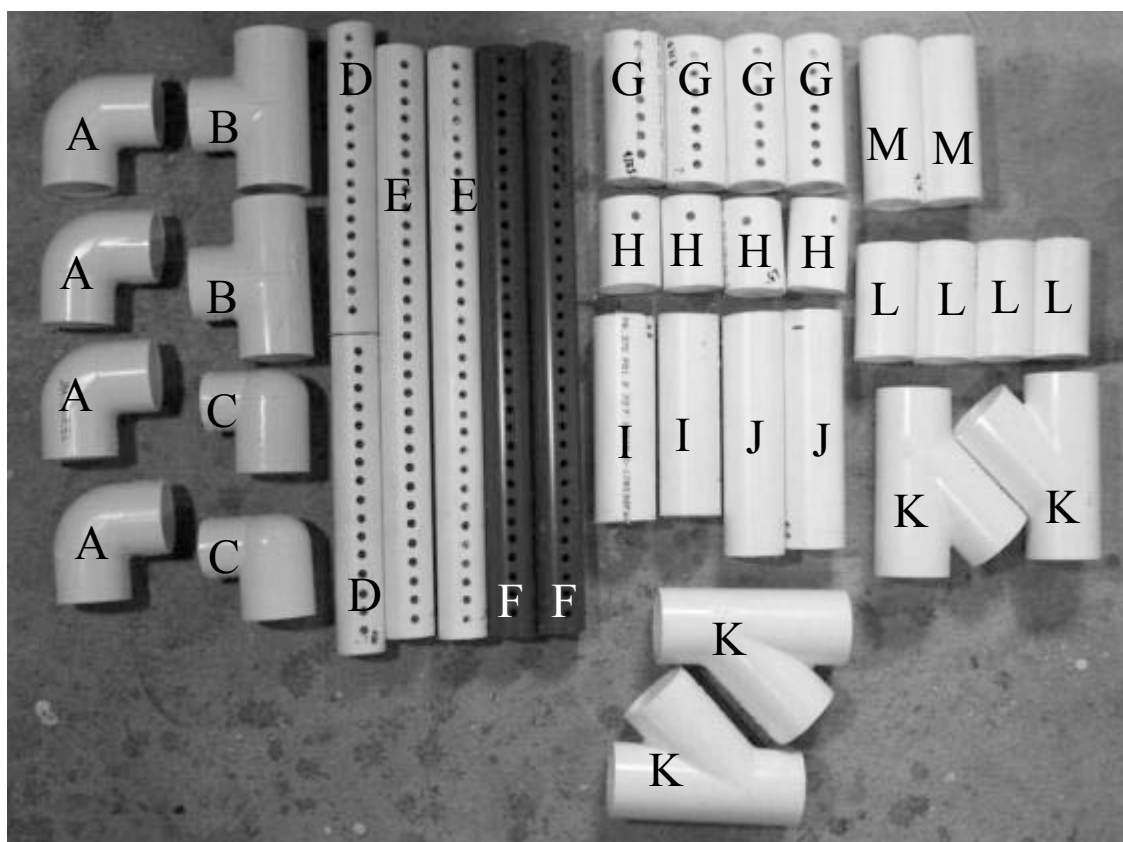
PVC Parts Needed to Assemble Large Wheelchair Frame.
